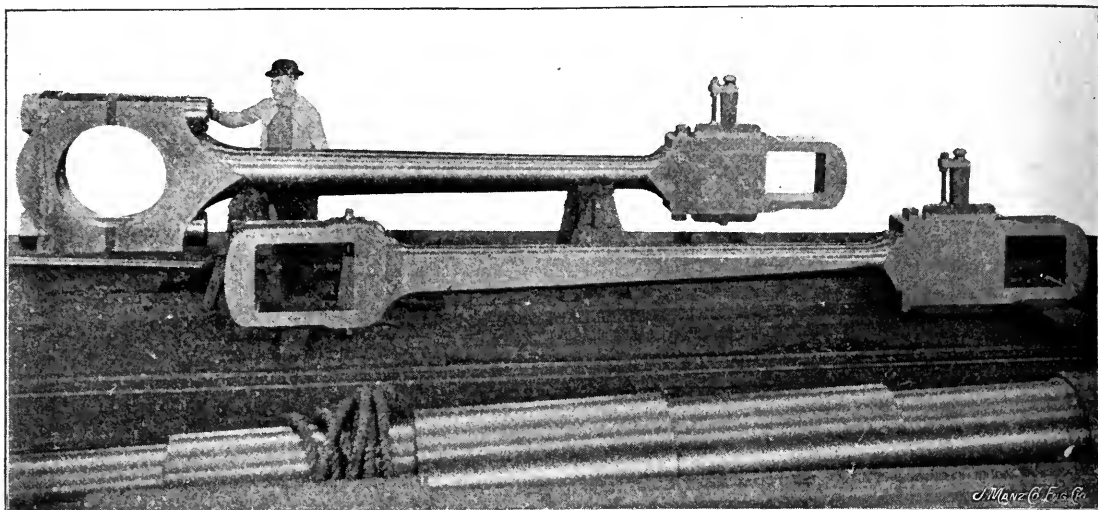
Connecting Rods for 50 x 72 inches Reversing Engine for Jones & Laughlin; engine manufactured by Mackintosh, Hemphill & Co., of Pittsburgh, Pa. Weight of small rod, 6,750 pounds; weight of large rod, 10,860 pounds.
